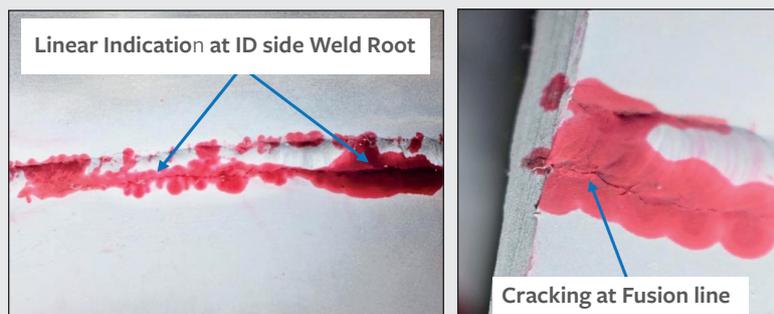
(a): Penetrant test at ID side revealed half section of the pipe to be cracked. Cracking was observed in the weld and HAZ / fusion line.
